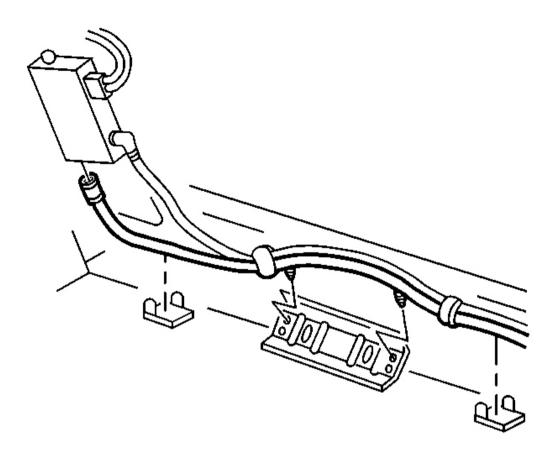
Front Windshield Antenna Coaxial Cable At Antenna Module Courtesy of GENERAL MOTORS CORP.
